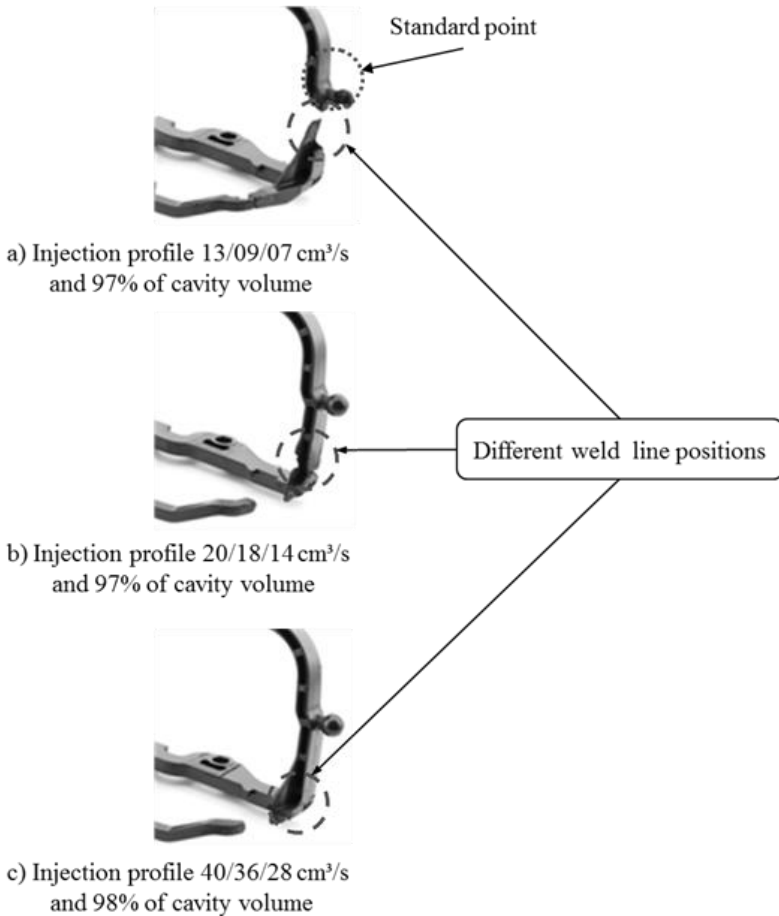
The weld line positions of different incomplete molded commercial parts
